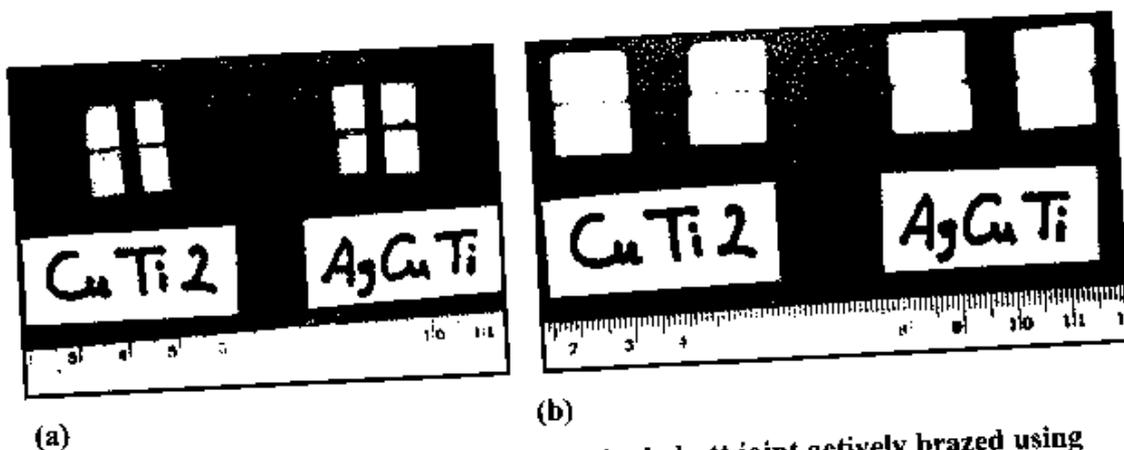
Two samples of ceramic-to-ceramic single-butt joint actively brazed using CuTi₂ and eutectic AgCuTi as a paste filler-metal, (a) the two samples were cut by diamond wheel perpendicular to the filler-metal cross-section and (b) showing the interface line.
